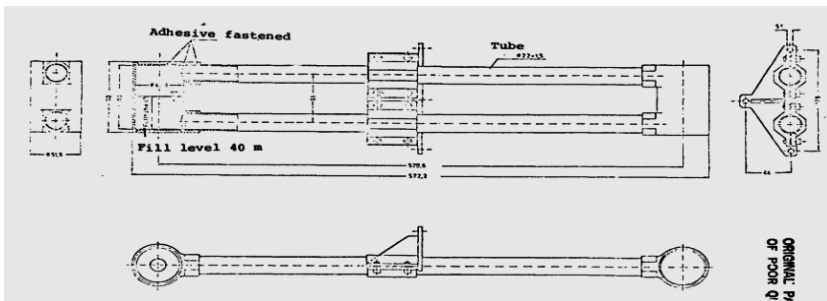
AMPTE ND build standard [19]. This damper design is adhesive fastened at the endpots whilst the COS-B damper and its successors were electron-beam welded. The drawing shows the liquid and vapor tube with the same radius a [mm] whilst the two cylindrical endpots have the radius b [mm]. The equilibrium liquid level in the endpots $h = H/2$ with H the endpot height which is indicated red. Together with the physical tube length L this yields the geometry design set $\langle a, b, L, H \rangle$.
